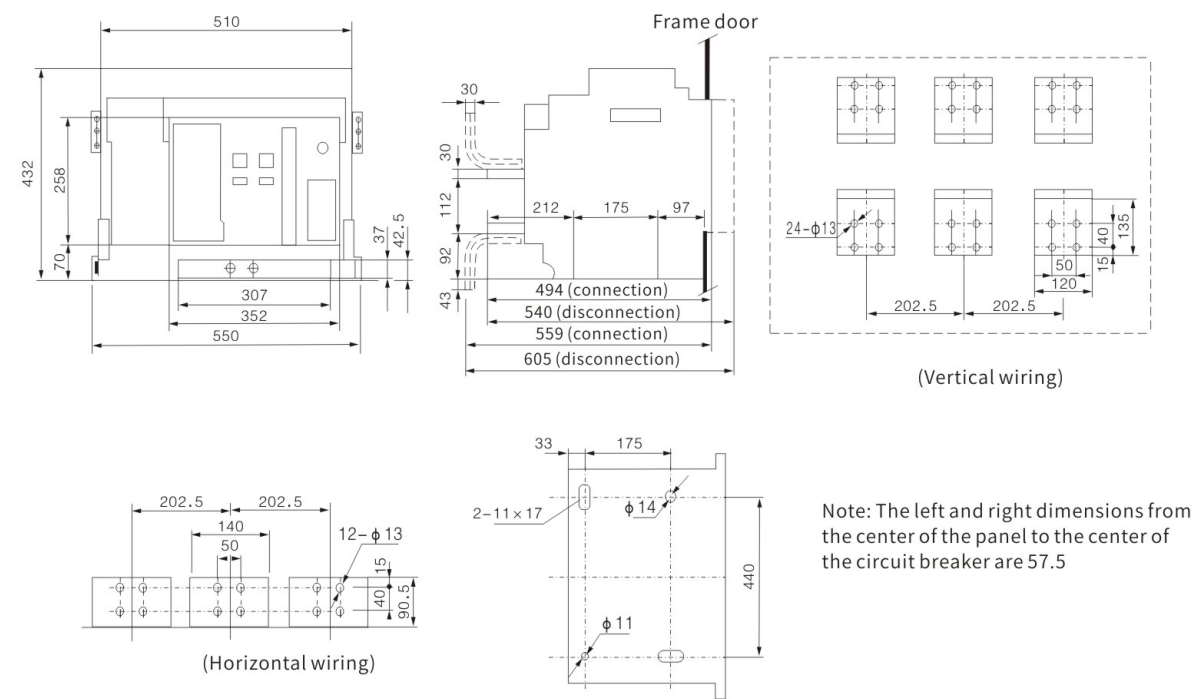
Outline and installation dimension of the draw-out type circuit breaker (W1-3200, 3200/4)
